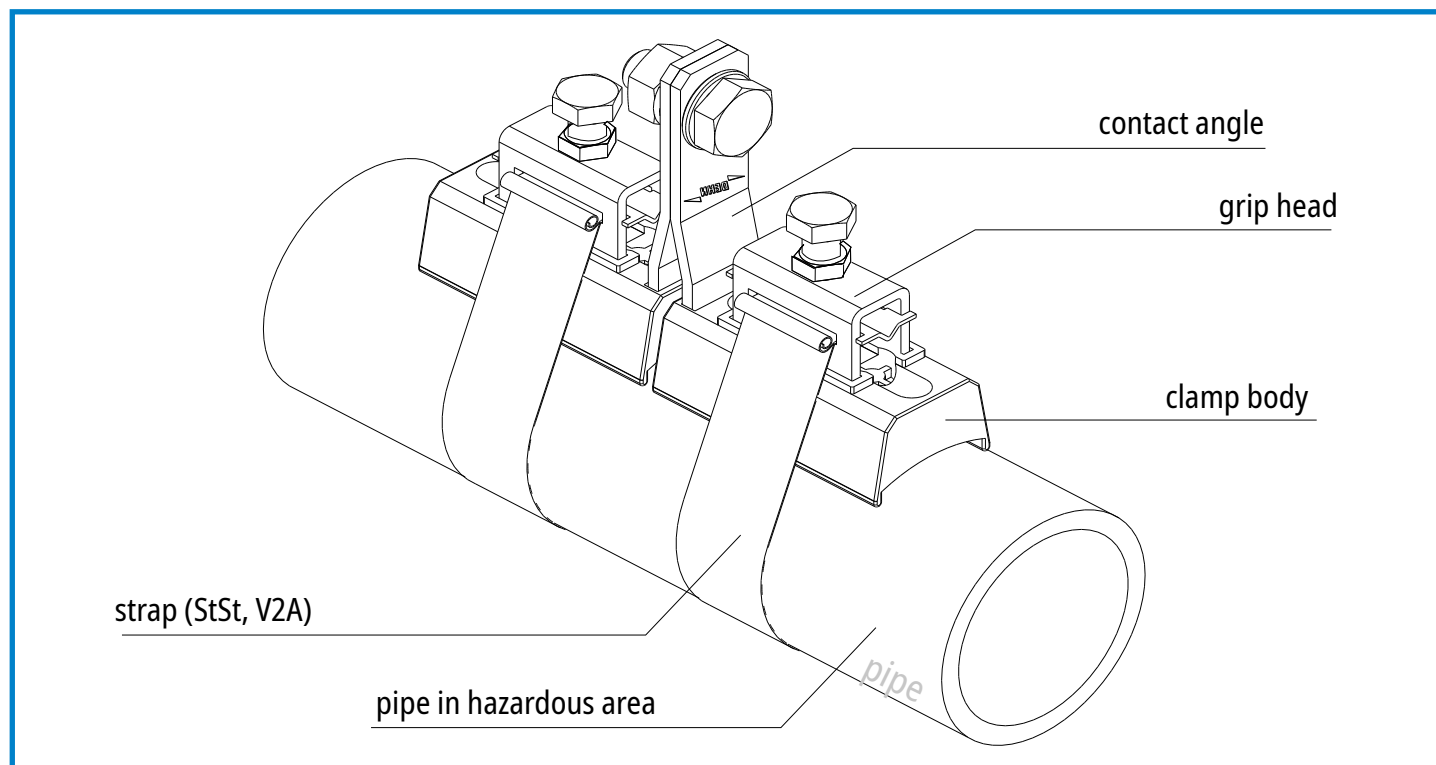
Ex-BRS 90/300/500 pipe clamp mounted on pipe (hadardous area)
